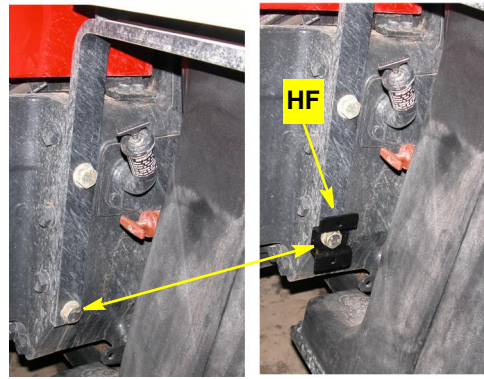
(L and R): Fitting the mounting bracket for the hydraulic block
